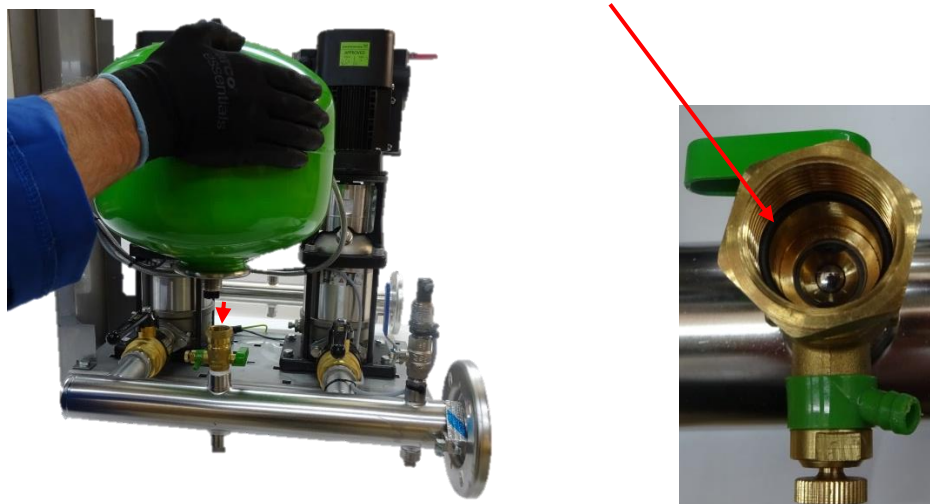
& b Fit flow through vessel into discharge manifold flowjet valve.
